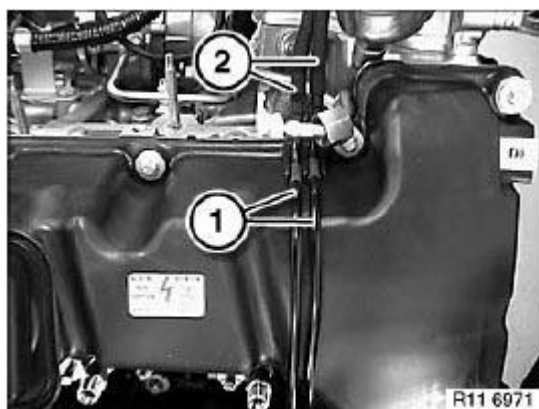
Identifying Vacuum Lines And Vacuum Lines
